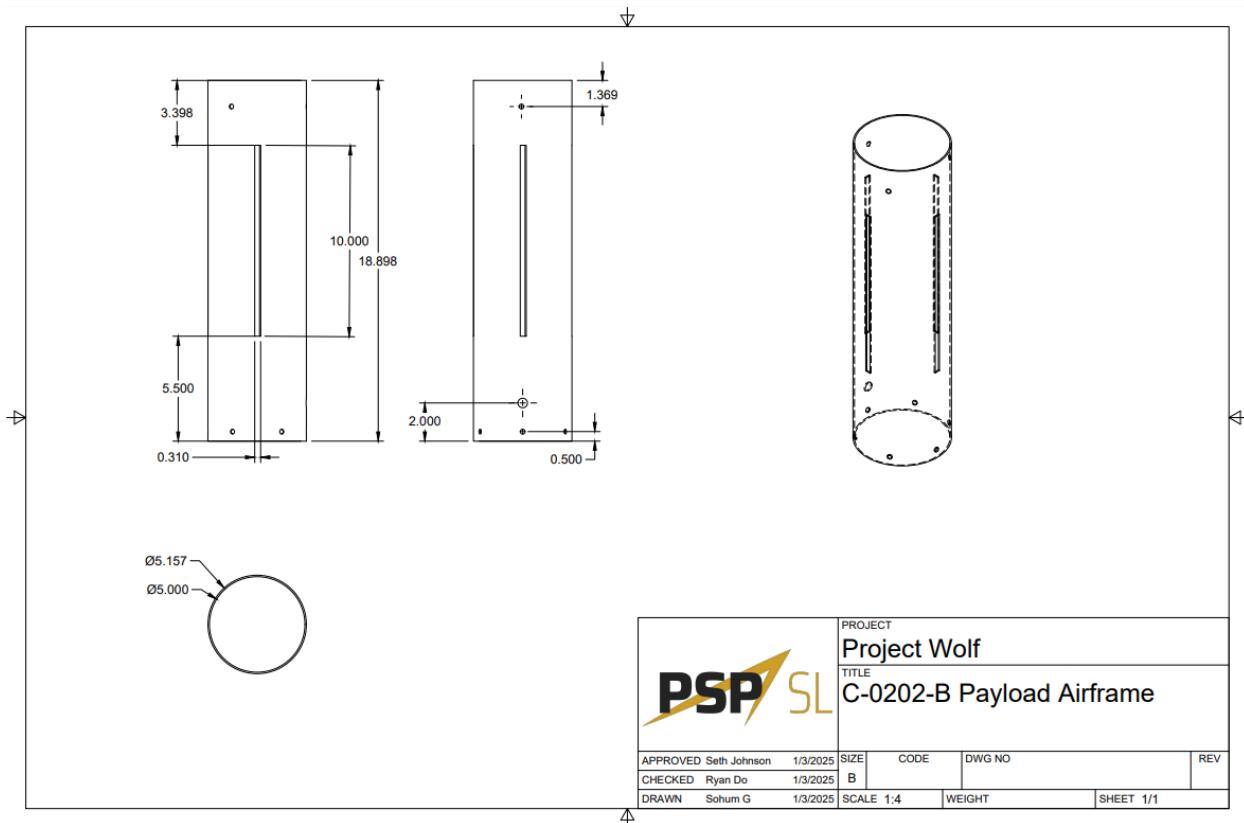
Payload Airframe Technical Drawing
